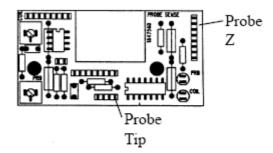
Probe Sensor/ Heater Control PCB Connections
